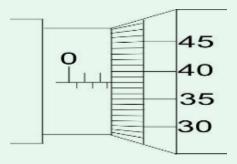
(a) Reading of the micrometre screw gauge measurement
